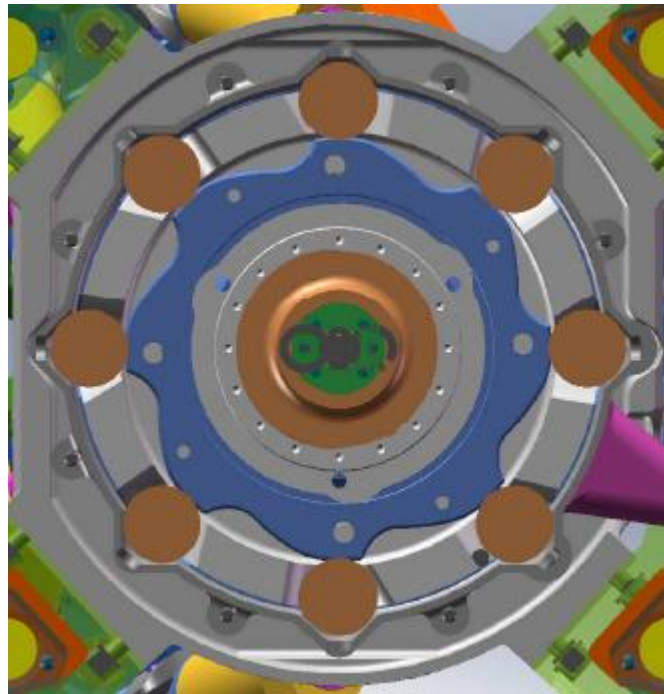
Wave Cam Locking Drill Bit Assembly to Robotic Arm
